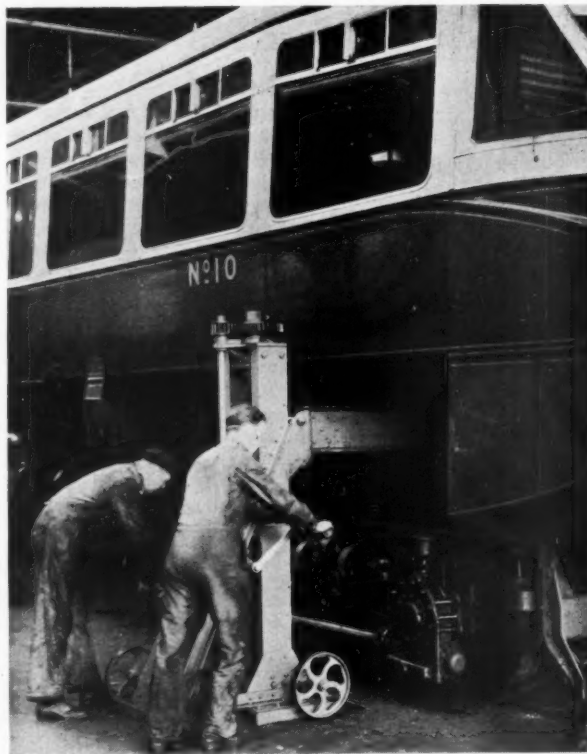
(above).—Lifting a railcar for heavy repairs at the Southall works
